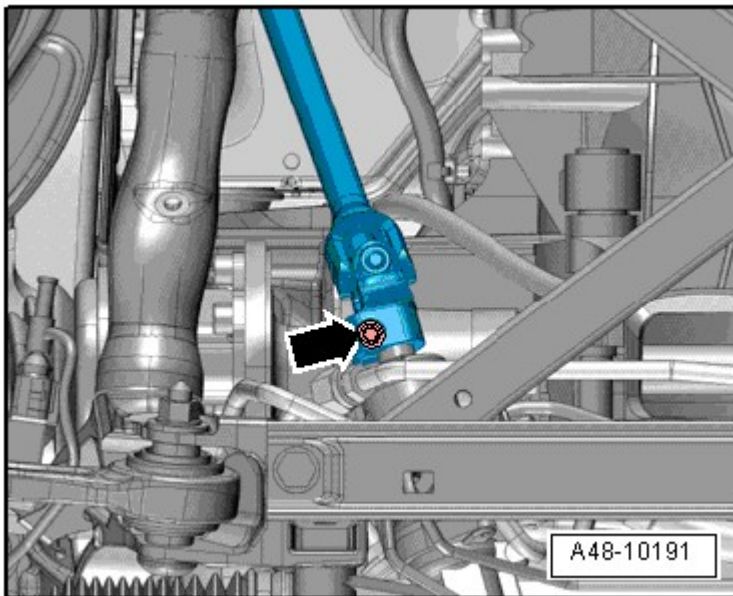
Pressing CV Joint Off Steering Gear And Slide It Up
